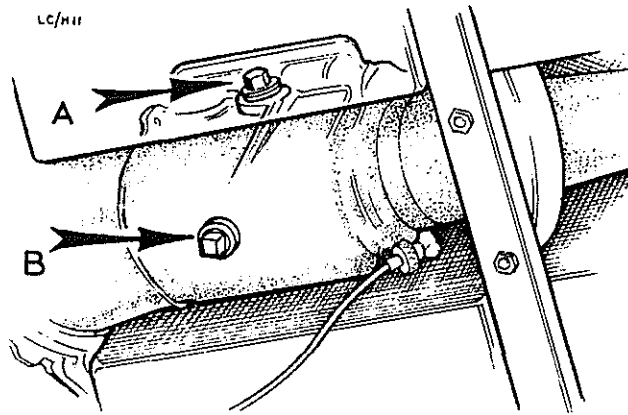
OIL FILLER & DRAIN PLUGS.
